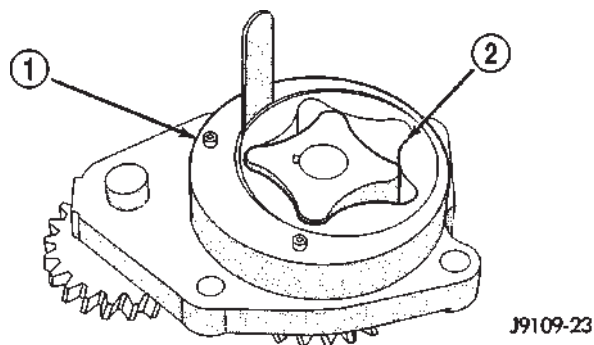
Measuring Gerotor Planetary to Body Bore Clearance
